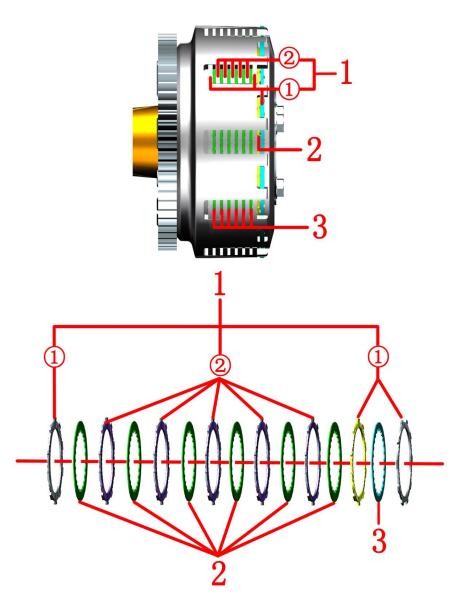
R	IGHT	Clutch assembly-2	CHK	Q
